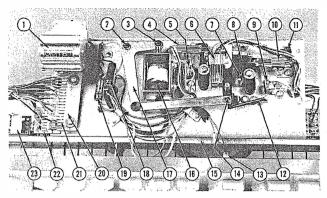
SELECTOR SWITCH ASSEMBLY, 2400S
